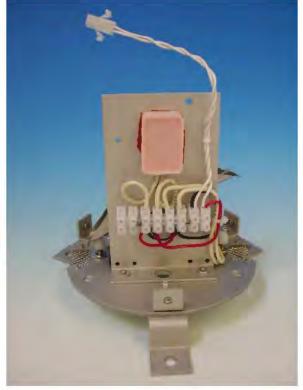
HEATER TERMINAL ASSEMBLY
